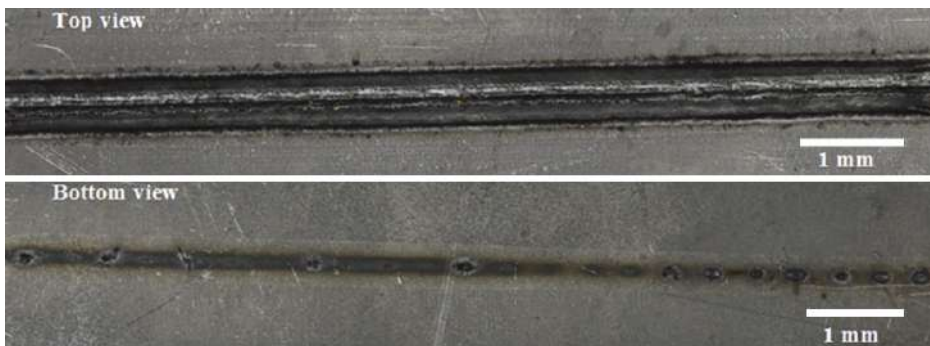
Top and bottom views of weld obtained under a scanning speed of 30 mm/s and a defocused off-set distance of 62 mm (the preheating and welding laser power is 4.0 kW; the welding speed is 60 mm/s)
